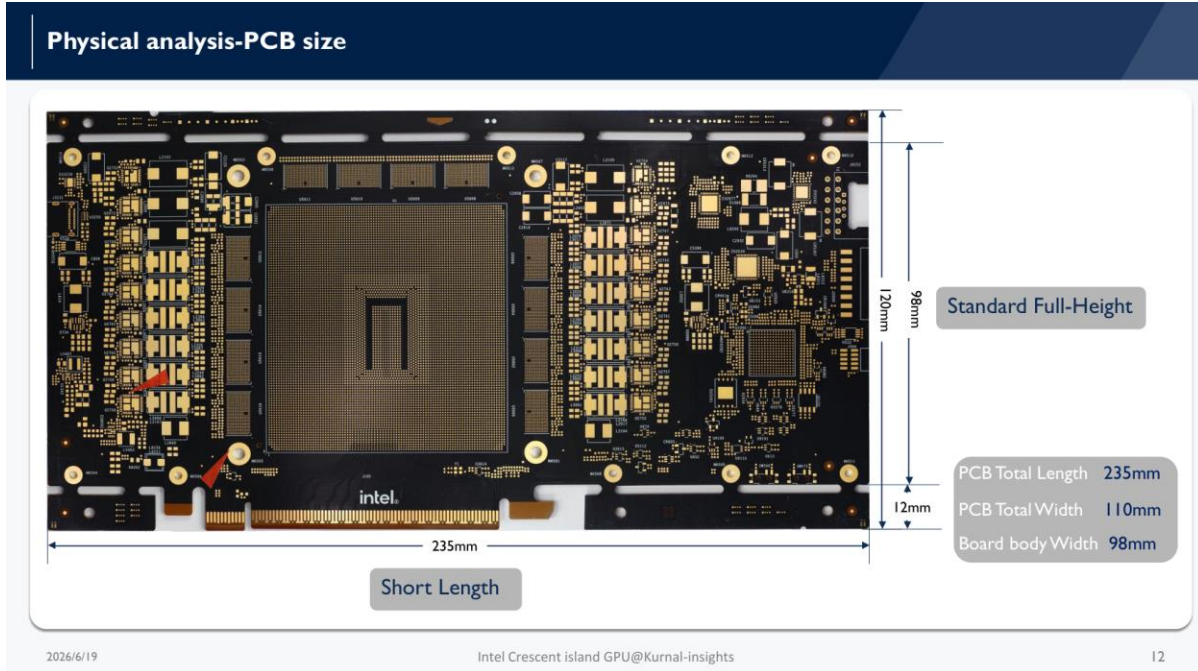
PCB mechanical dimensions – 235 mm length, 110 mm width, 98 mm body width.
